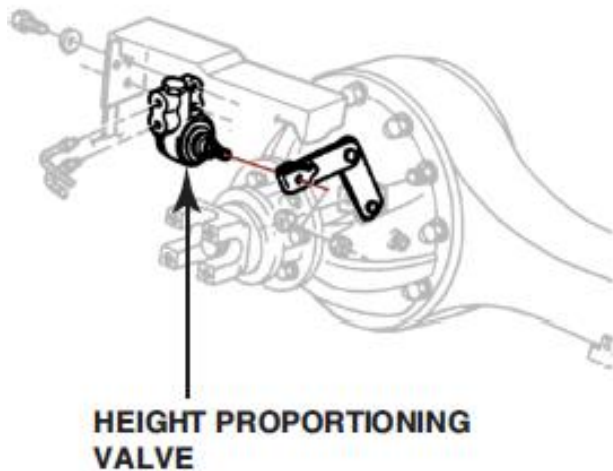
The height sensing valve is mounted to the frame, and an arm connects to the rear axle.
